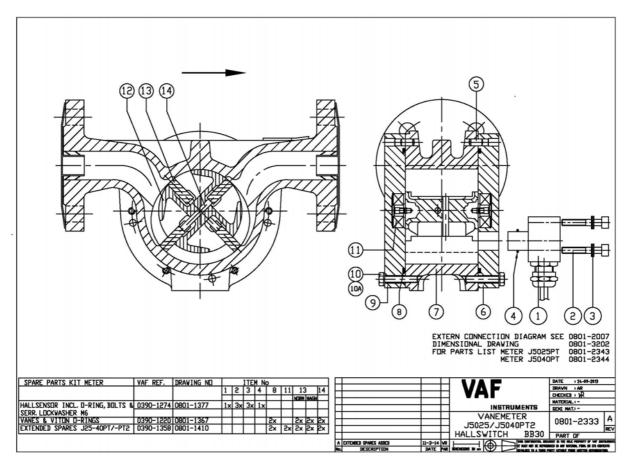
Assembly Flowmeter J5025PT2 and J5040PT2
